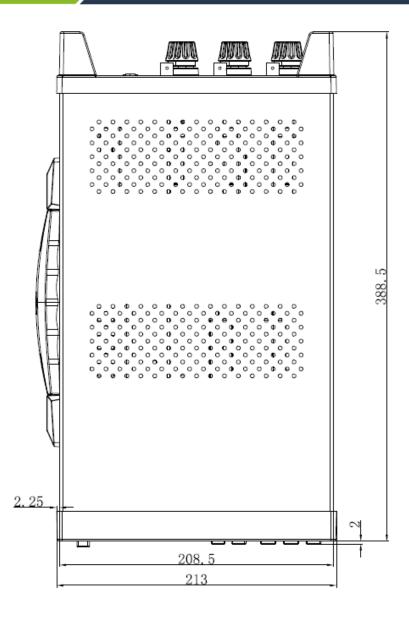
Mechanical dimension drawing of PA323 power meter (top view)
